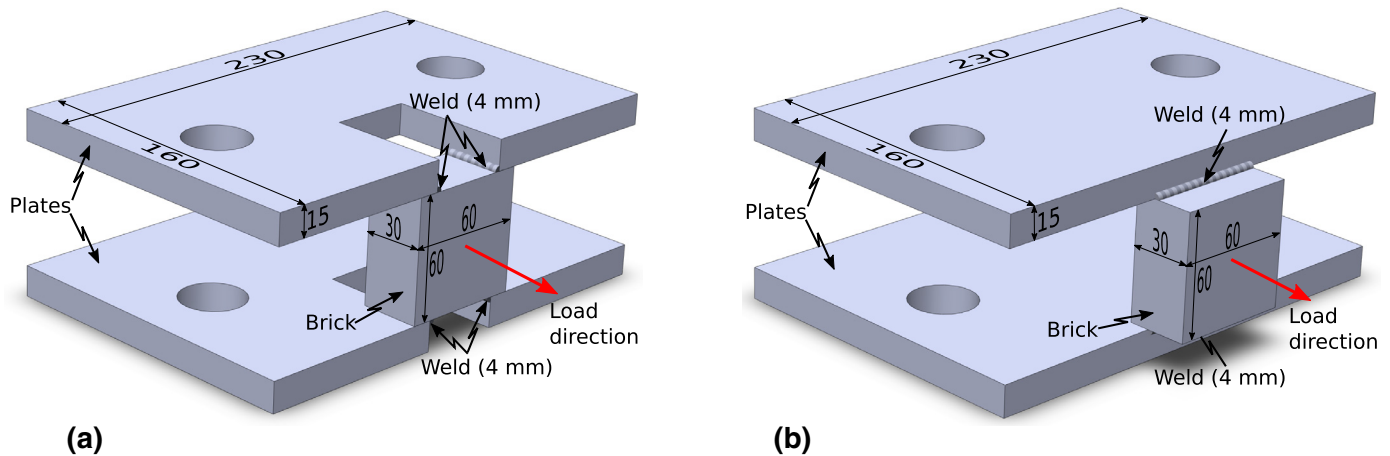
Illustrations of the component test specimens (dimensions in mm). (a) The longitudinal specimen, which has four fillet welds, (b) The transverse specimen, which has two fillet welds.
